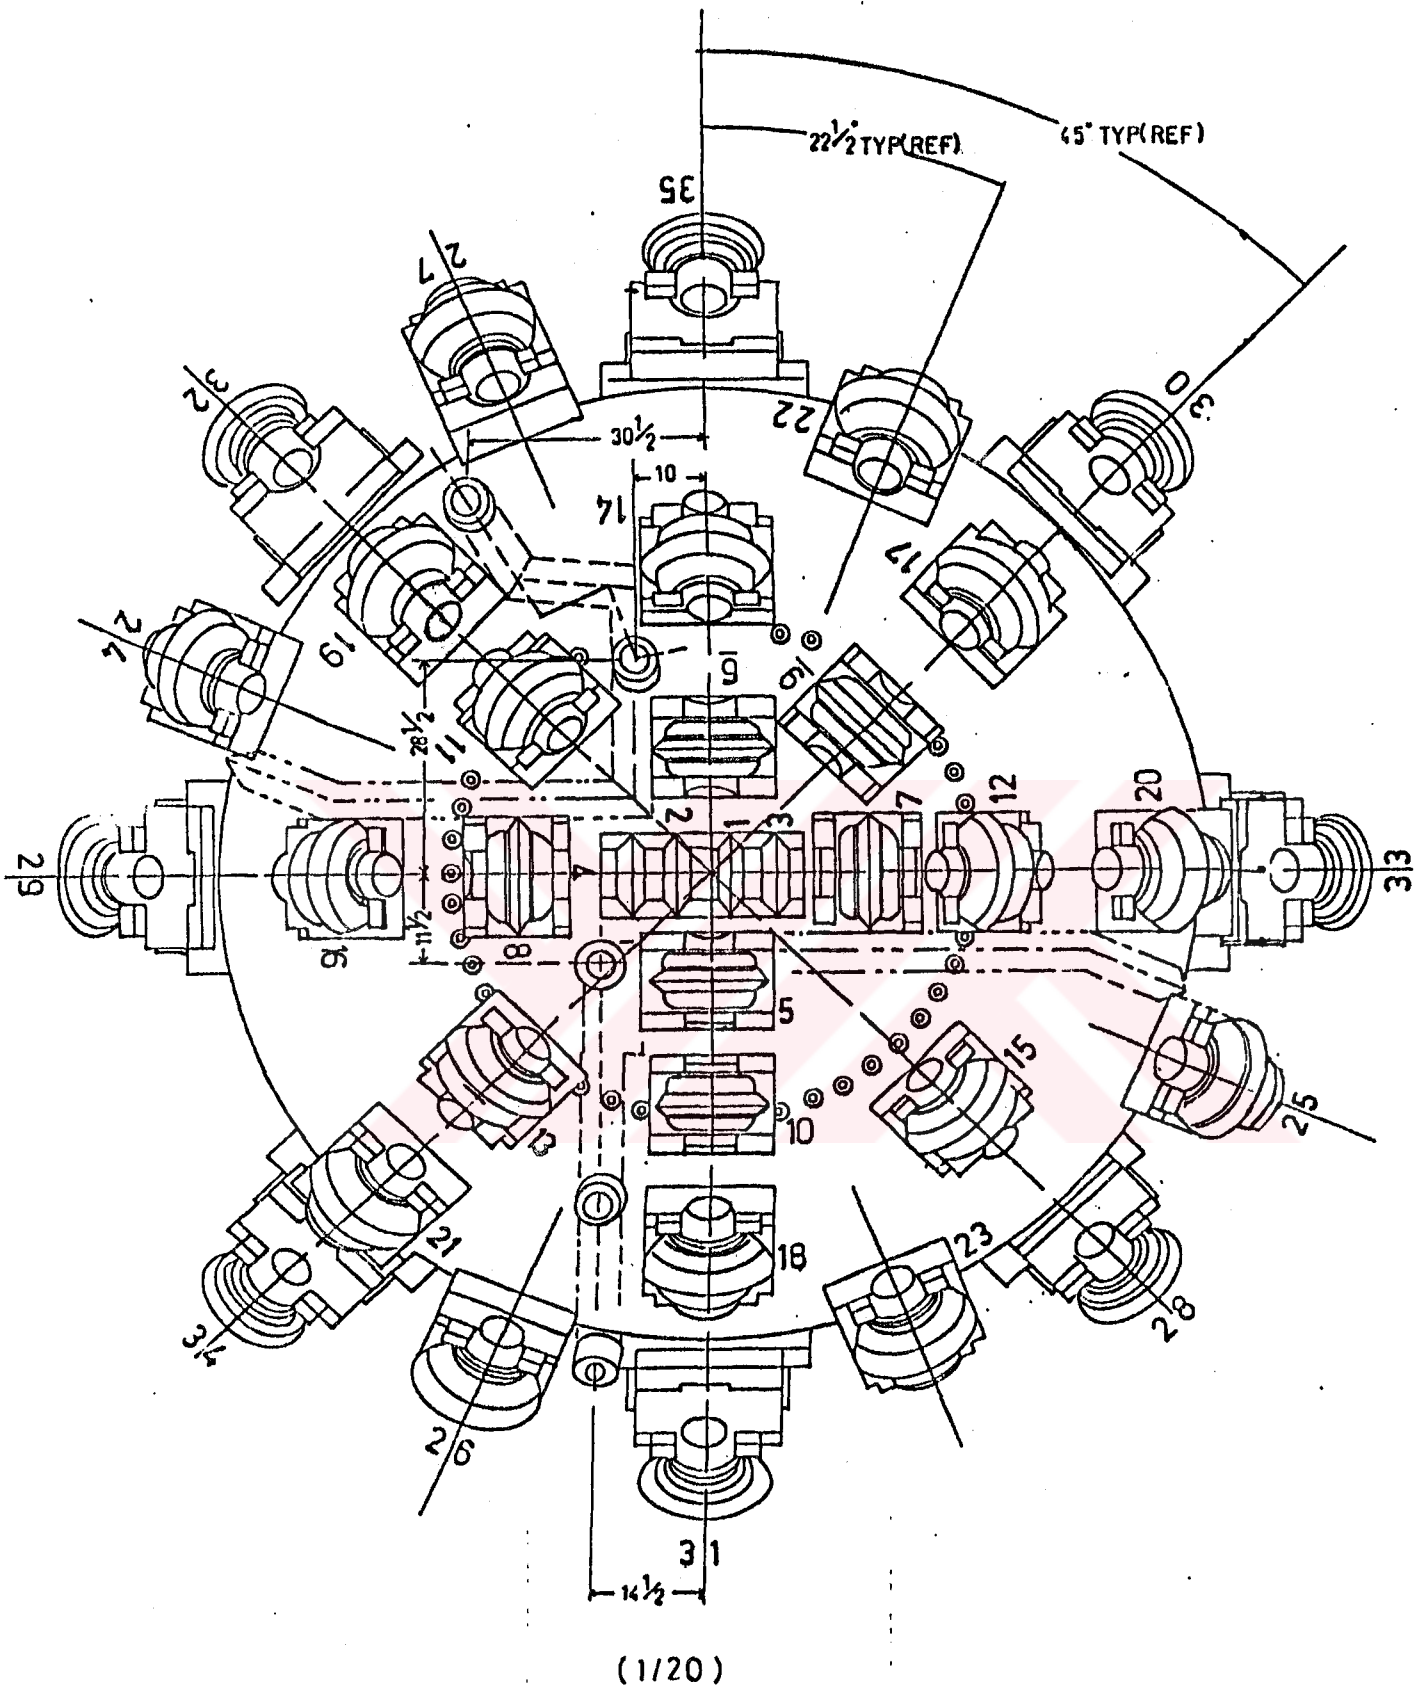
Position Of Disc Cutters On The Cutterhead
